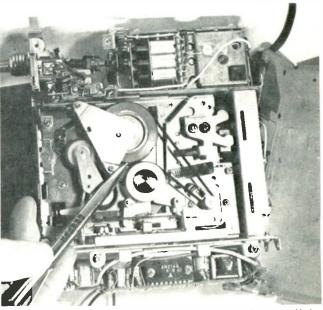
Check for a motor drive belt that is broken or off the pulley. Next, examine the belt for oil or cracks. Hold the flywheel while the motor is rotating. If the motor pulley continues to turn inside the belt, replace the belt.
